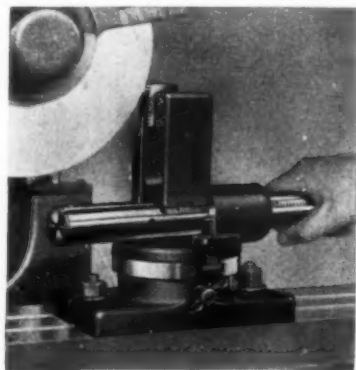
With a change to slide bar for "taps" radius scale, the fixture is set up for chamfering collapsing tap chasers. Complete fixture adjustment facilities plus machine table stop-setting assure swivel-ground uniformity of the entire set.
